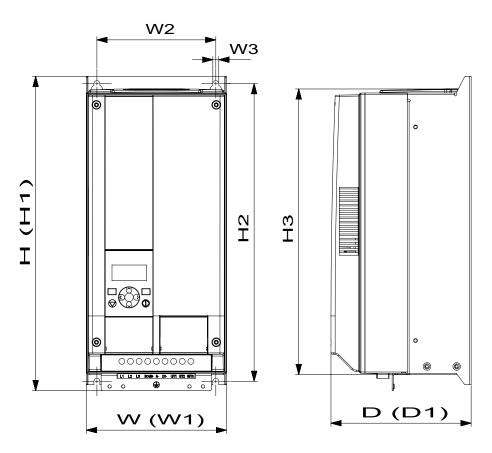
HVAC232/402 dimensions, MI4 -MI5
